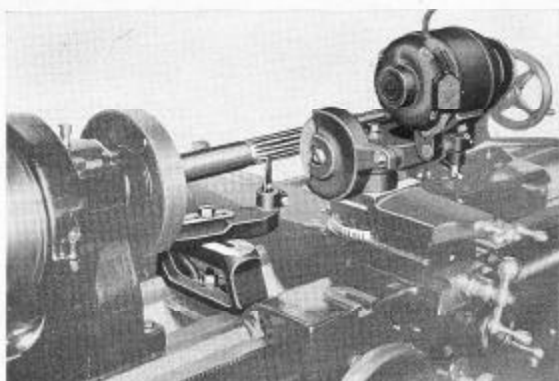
Sharpening a Straight Reamer in the Lathe. Fig. 10 illustrates the lathe and grinder set up for grinding a straight reamer. In this set-up the regular grinding wheel is used, however the cup wheel, as shown in Fig. 9, may be used, if preferred; either type wheel will produce a satisfactory job.
